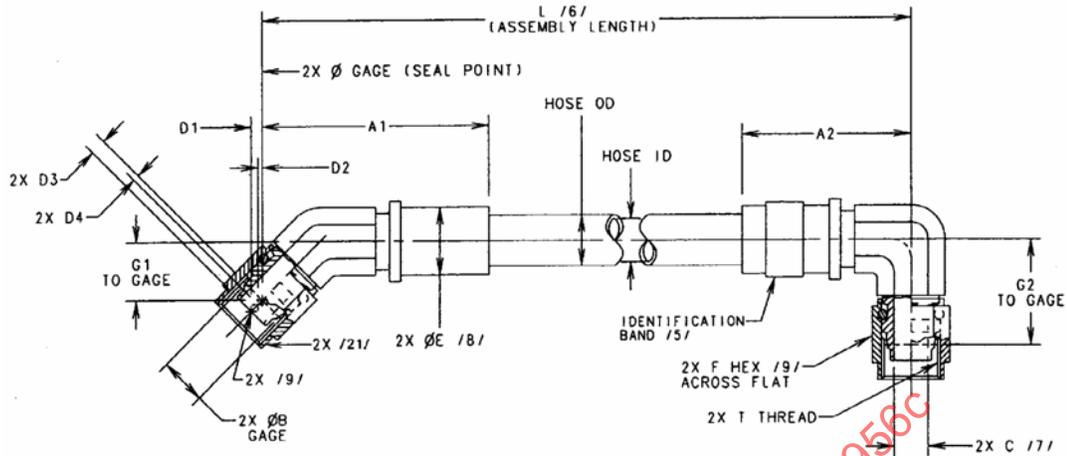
FLARELESS HOSE ASSEMBLY, 45° TO 90° ELBOW
